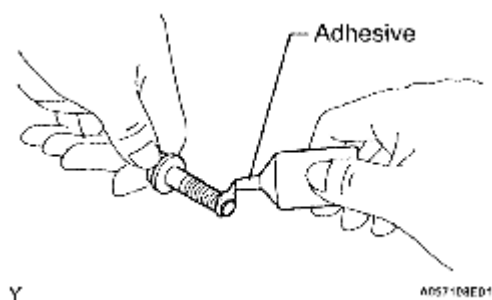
Applying Adhesive To End Or Threads Of Bolts
